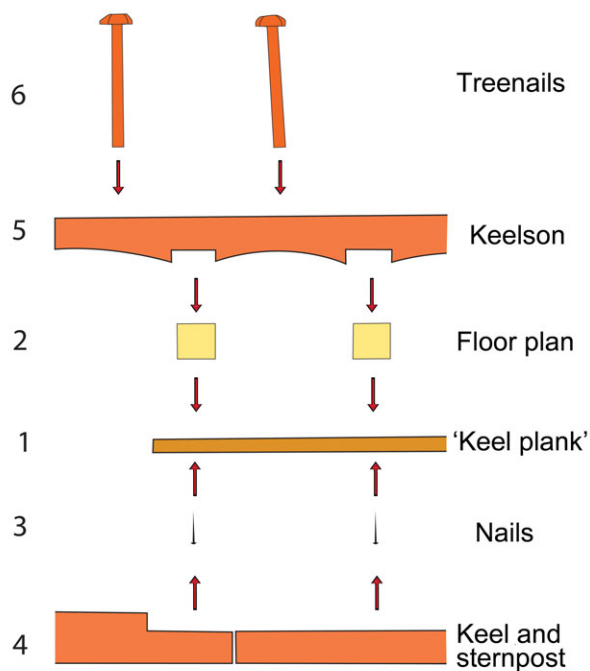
Longitudinal section of the stern and process of its construction: 1–3: 'keel plank' nailed to the frames. 4–6: keelson, 'keel' and sternpost joined with treenails. (Marcel Pujol i Hamelink)
